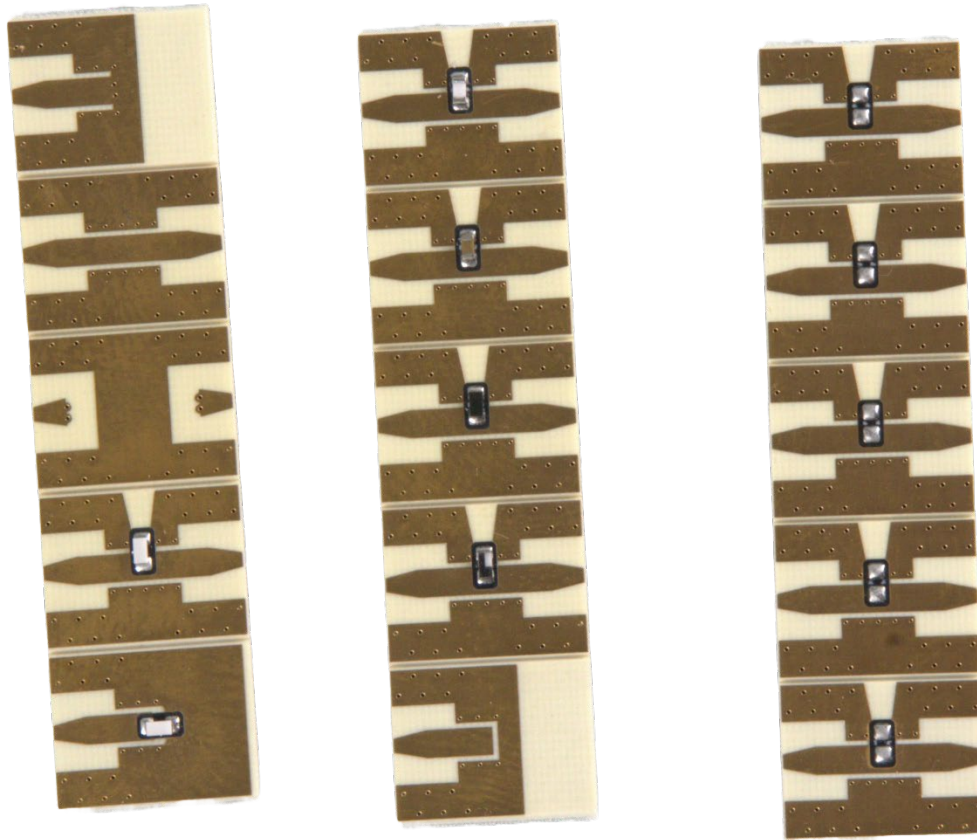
Calibration boards (left), sample test components (center) and blank DUT boards (right).
